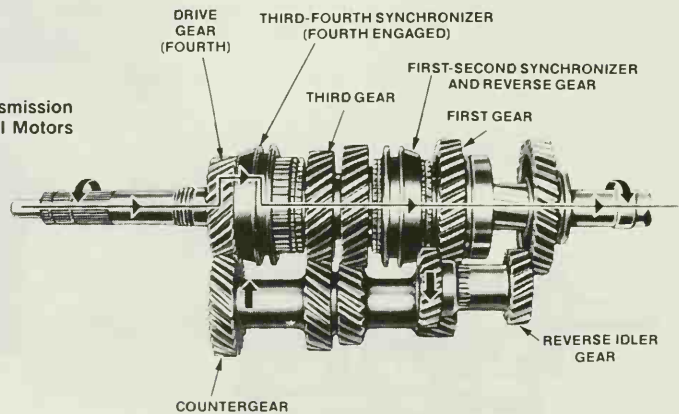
Power flow through a four-speed transmission in high gear or direct drive. (Chevrolet Motor Division of General Motors Corporation)
